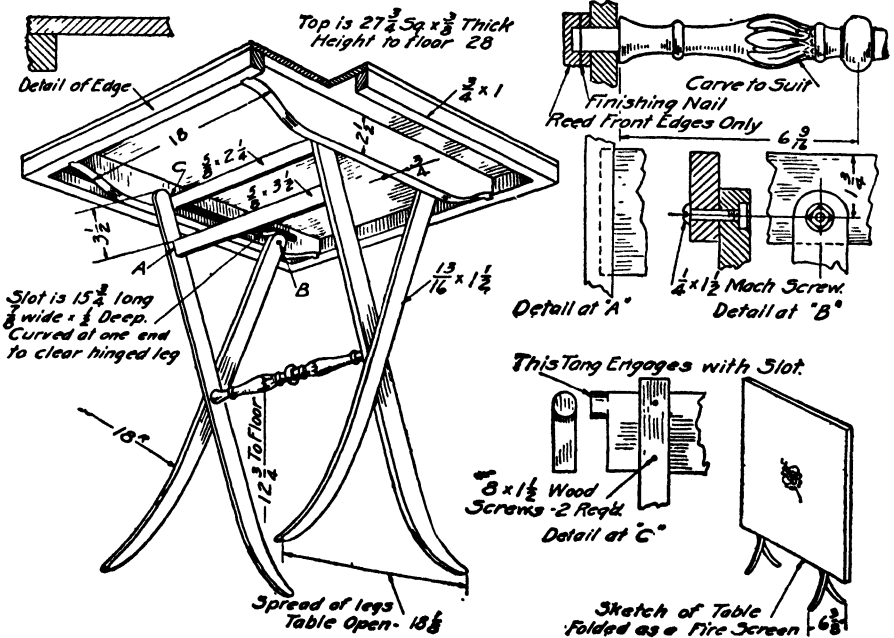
Prob. 295. Draw assembly and details for the folding card table.
